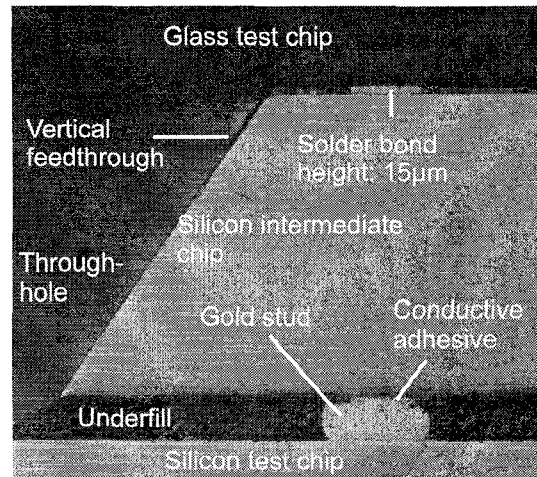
Complete three-layer stack consisting of a glass test chip solder bonded to an intermediate chip with frontside to backside interconnections and a silicon test chip adhesively bonded to the above two-stack.
